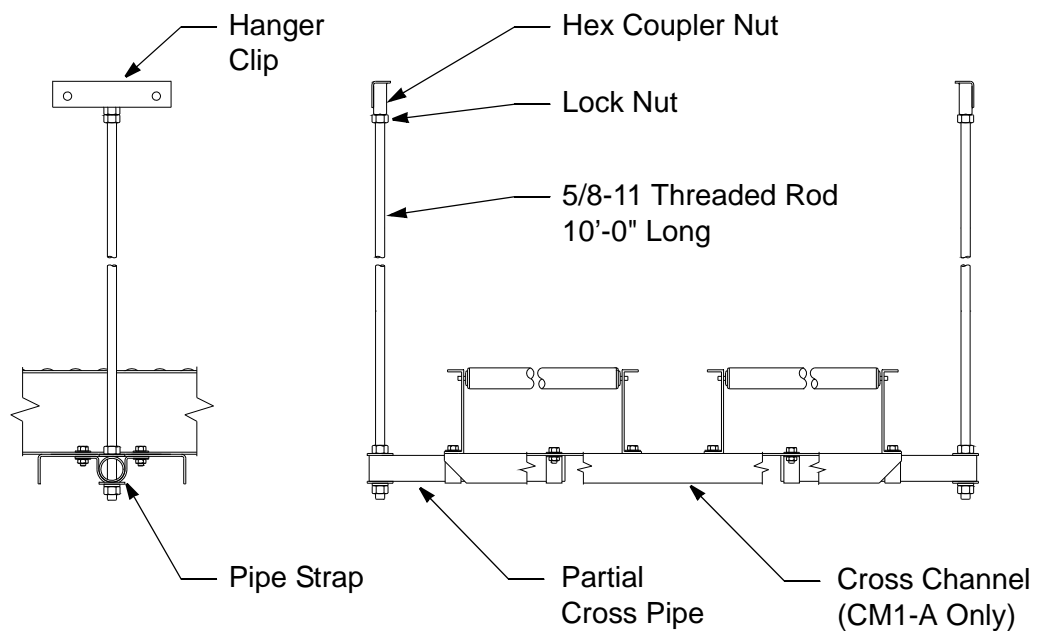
CM1-A & CM1-B Ceiling Hangers
